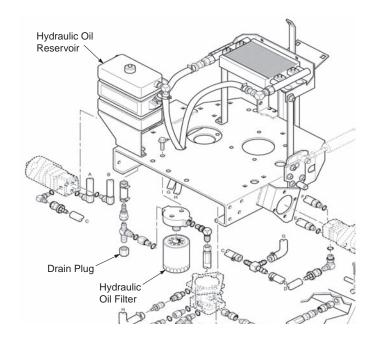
Hydraulic Oil Filter and Drain Plug
